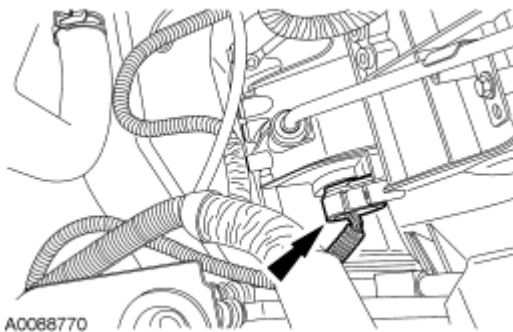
Locating Transaxle Bulkhead Electrical Connector
